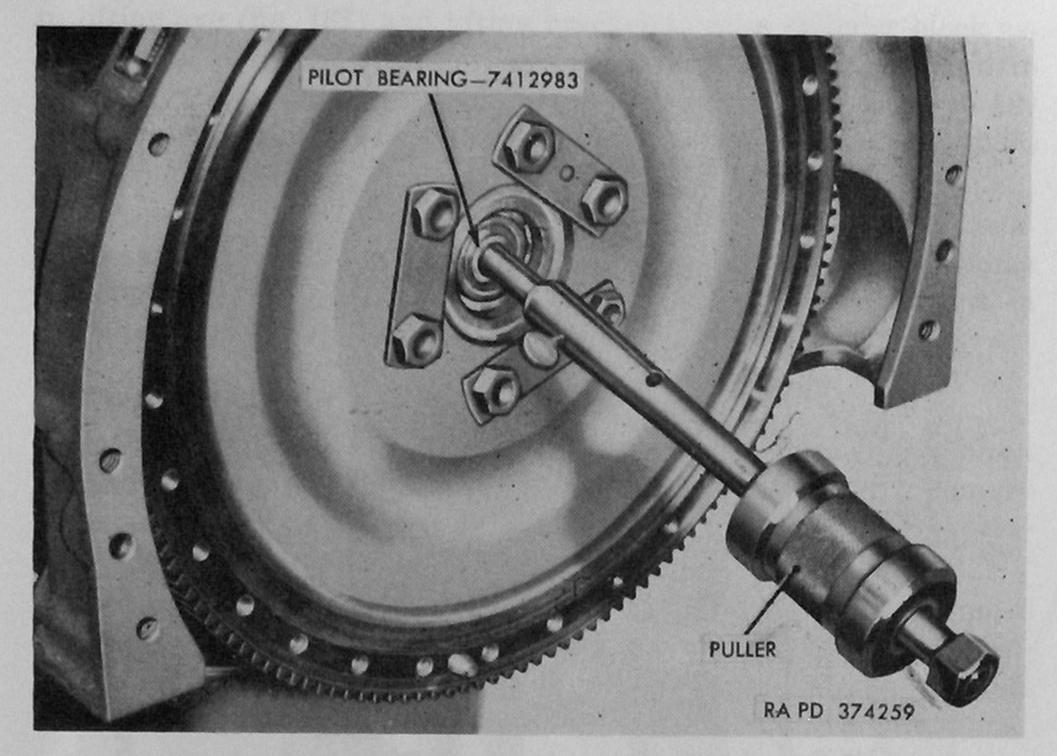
Removing pilot bearing assembly from crankshaft using puller 7077742.
